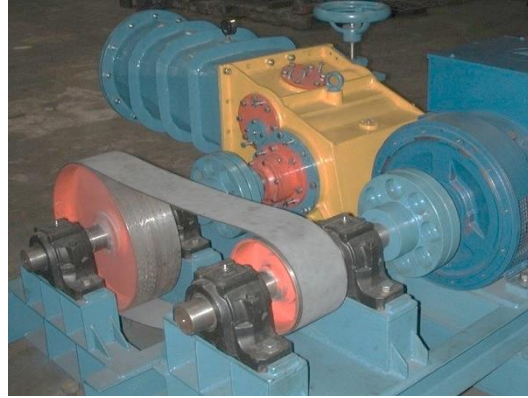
Typical step-up transmission with layshaft arrangement showing plummer block bearings and flexible couplings.
